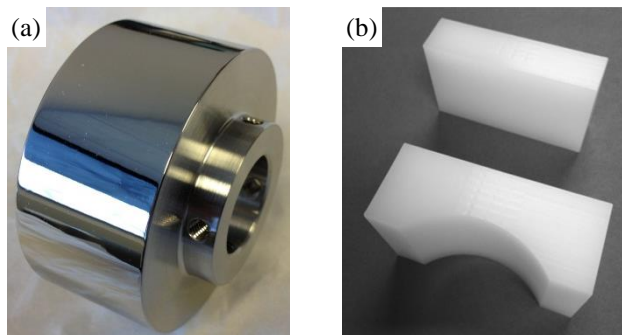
Typical examples of bearing pair specimens, showing (a) CoCr cylindrical surface 1, mounted on reciprocating shaft and (b) UHMWPE surface 2 mounted on the loading mechanism. (Reproduced with permission from [98].)
